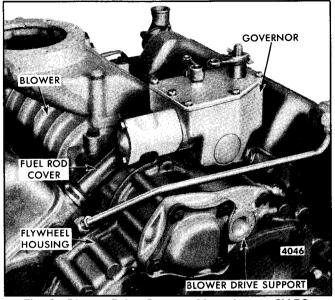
Blower Drive Support Mounting on 6V-53 Engine
